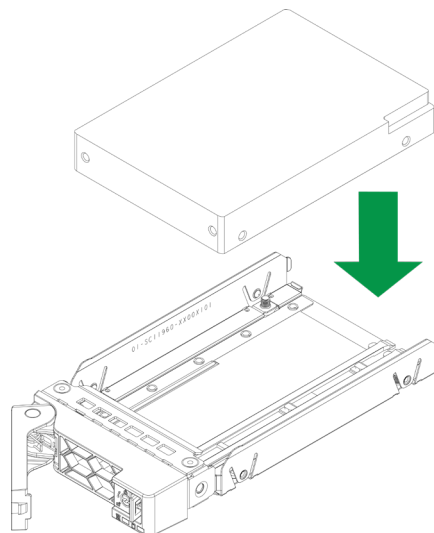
Placing a 2.5" Storage Drive into the Drive Carrier
